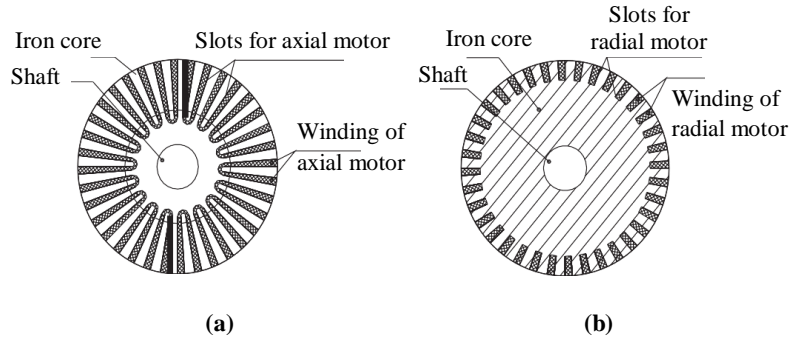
View of stator core and winding (a) Right view of stator core, (b) A cross-sectional view of the core shaft
